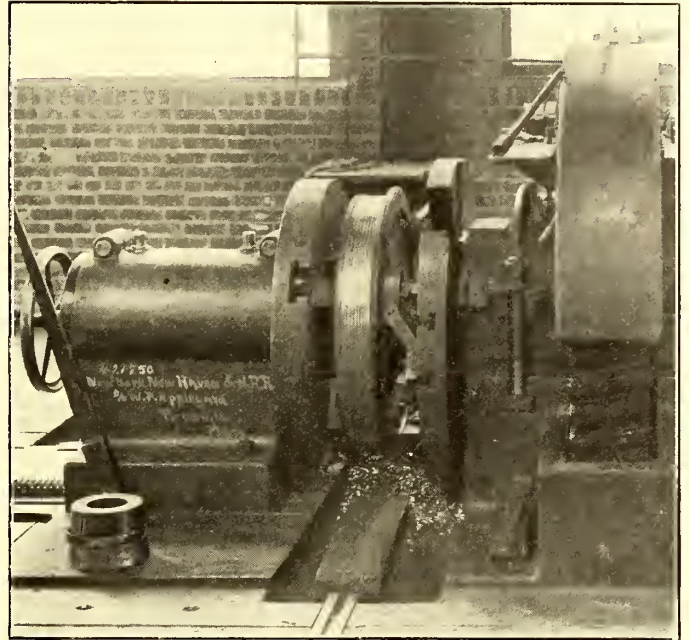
DETAILS OF THE "SURE GRIP" DRIVER MECHANISM USED ON THE CHUCKS FOR DRIVING DIRECT TO THE TIRES
